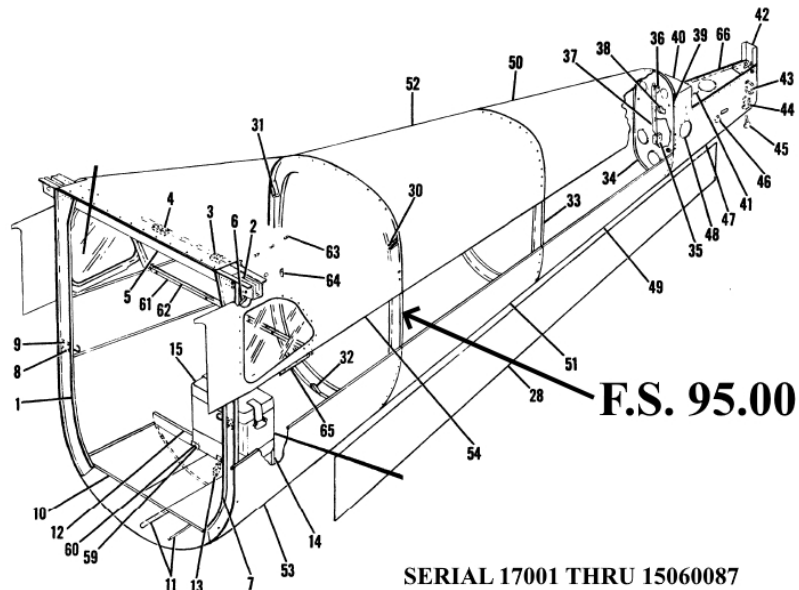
FUSELAGE TAILCONE ASSEMBLY
